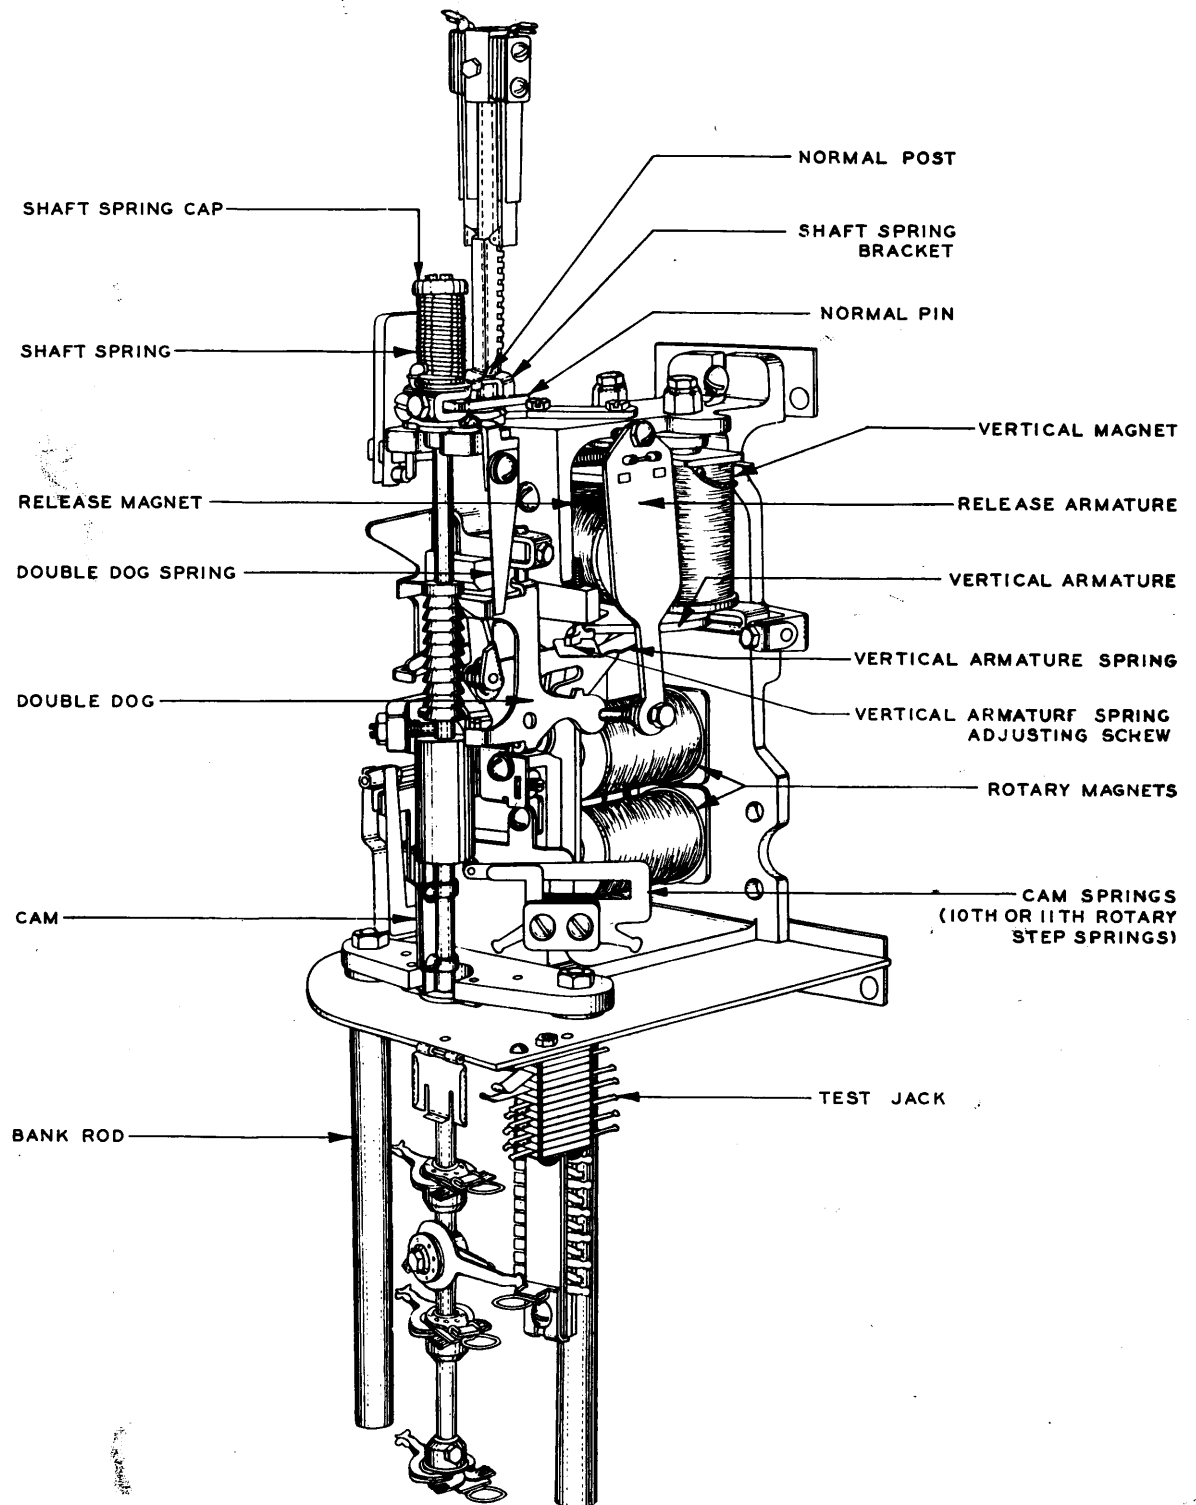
Illustrating Parts of 197-type Switch as Viewed From the Right Side
